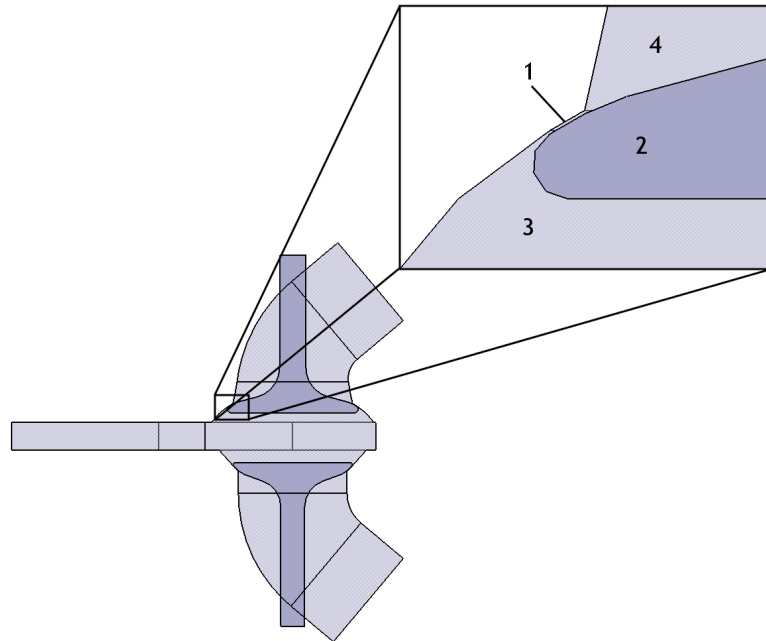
Detailed view of the valve gap: 1 - Gap; 2 - Valve head; 3 - Combustion chamber; 4 - Port
